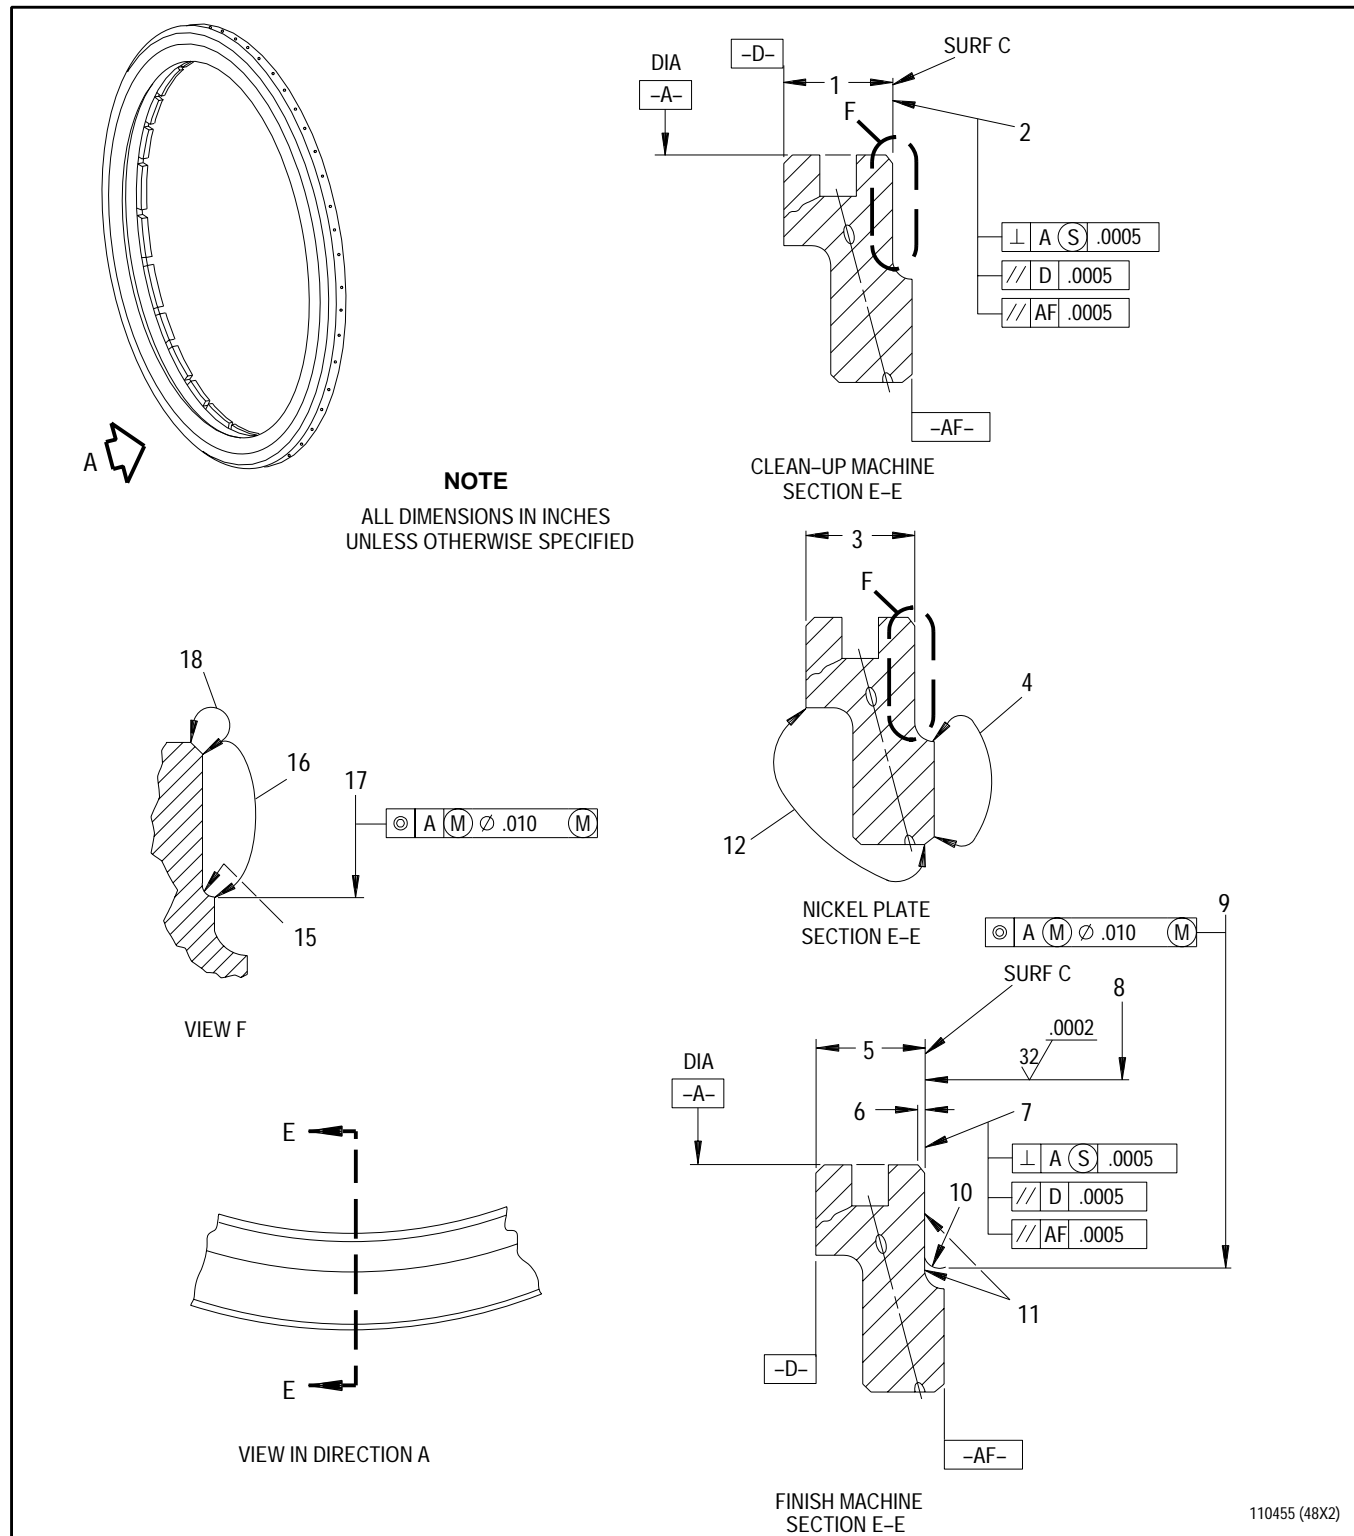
No. 4 Bearing Rear Seal Seat (PN 4083144) - Nickel Plate Rear Inner Face Repair
